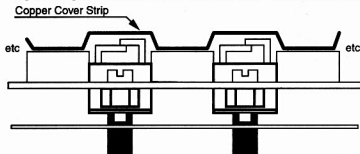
Arrangement of Switch "Shorting" terminals - end on view to switches.
